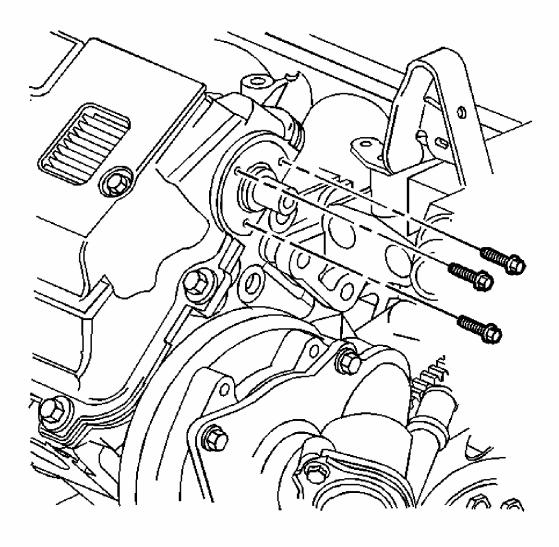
Identifying Camshaft Seal Retainer Bolts Courtesy of GENERAL MOTORS CORP.
